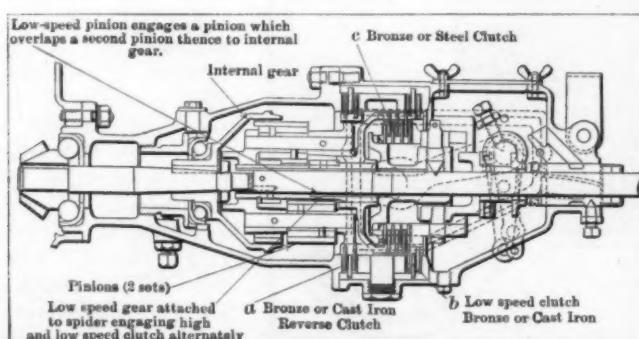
Planetary gear set, showing multiple disc clutches, system of gears, and screw system of engaging the high speed
